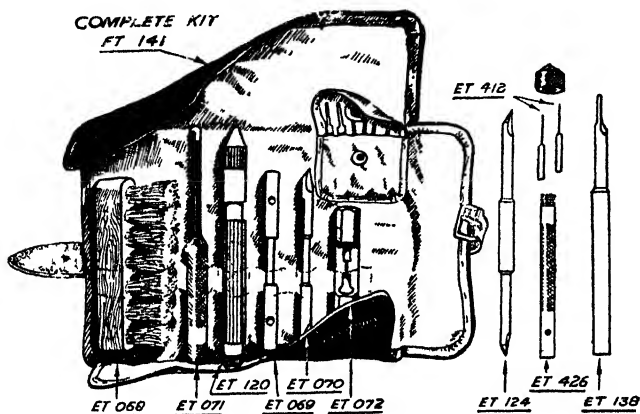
Cleaning Tool Kit for Nozzles and Nozzle Holders.
